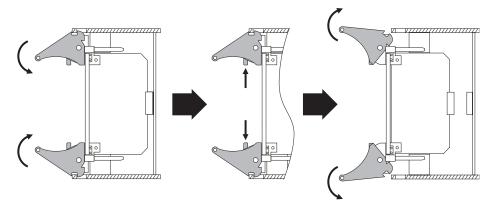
Unlocking and Using the Ejector Levers to Remove the Board
